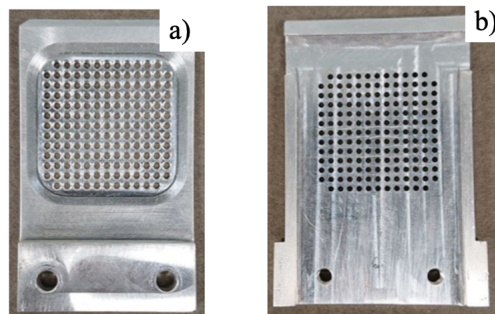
Picture of a) outer side of the front mask and b) inner side of the back mask of a perforated holder.
